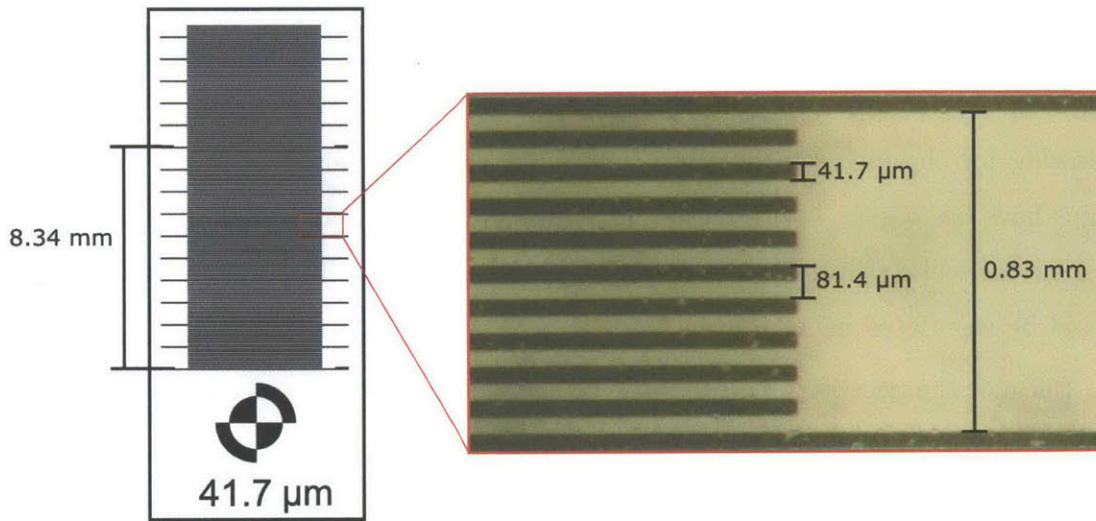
The encoder strip was printed on a mylar emulsion. both large scale (left) and smaller scale measurements (right) were performed to ensure the strip was manufactured to tolerance.
